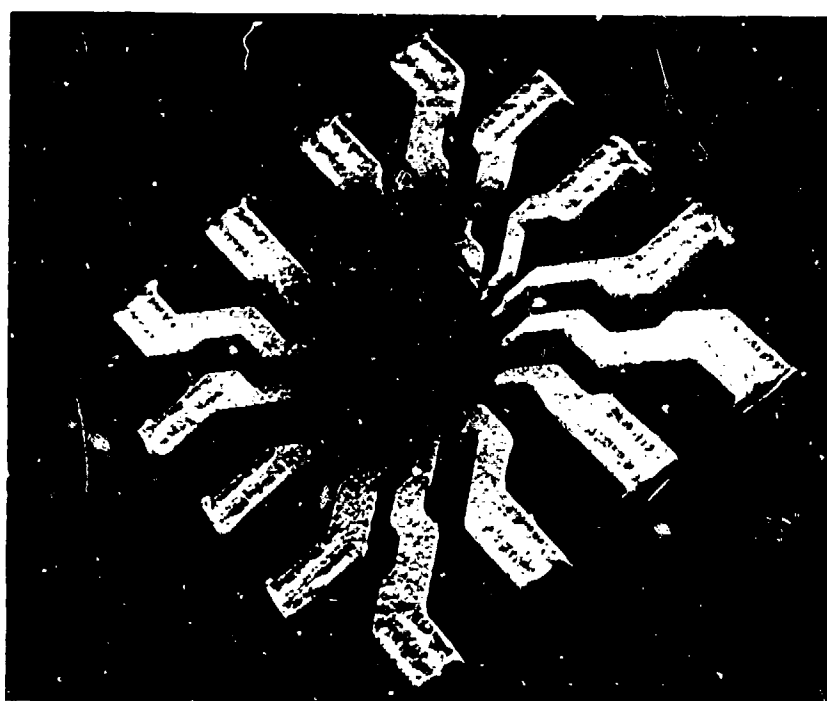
Chip Attached to DB Cu Bumped Lead Frame
